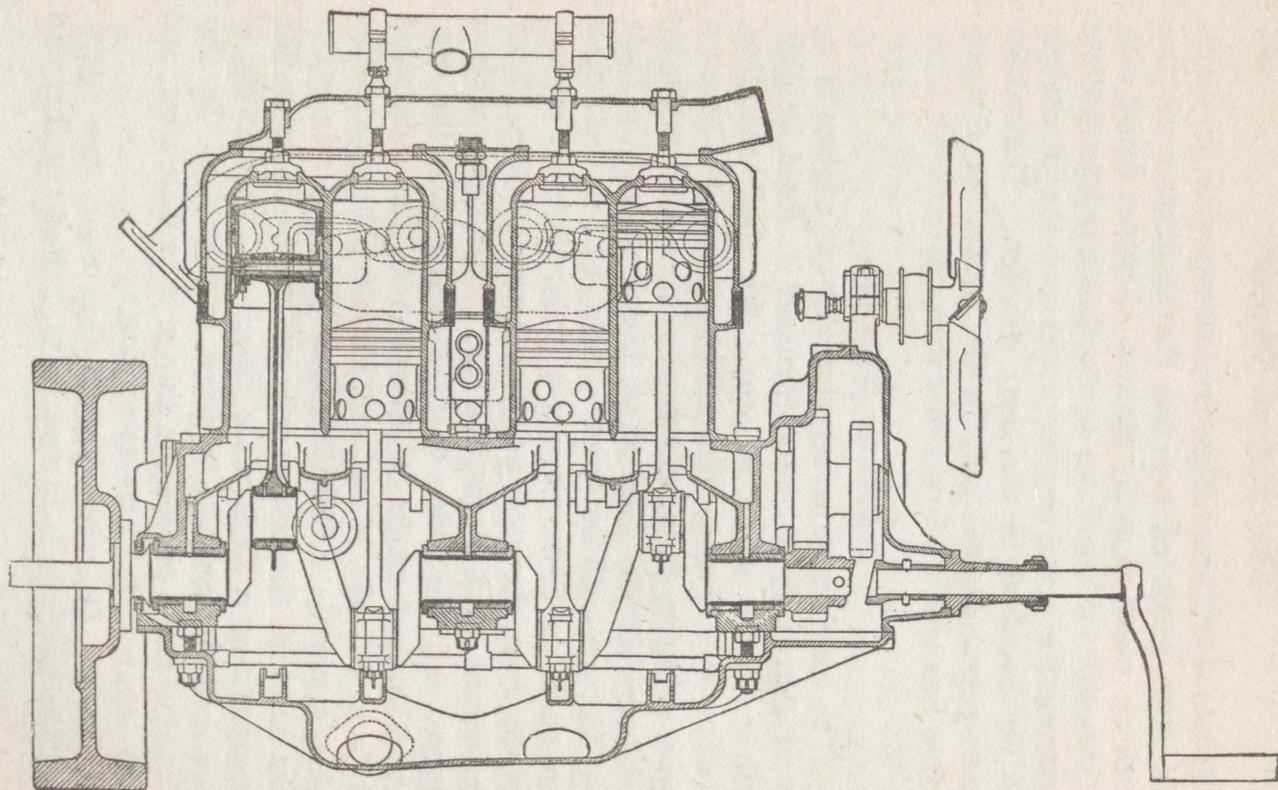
Longitudinal section of a 16-20 horse-power engine
